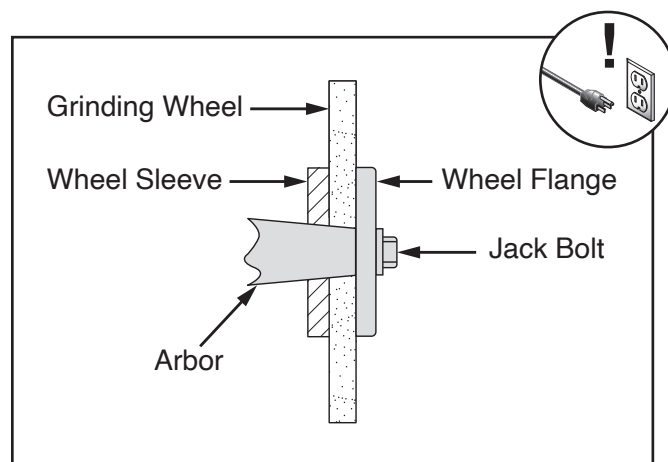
Jack bolt threaded into wheel assembly and arbor.
